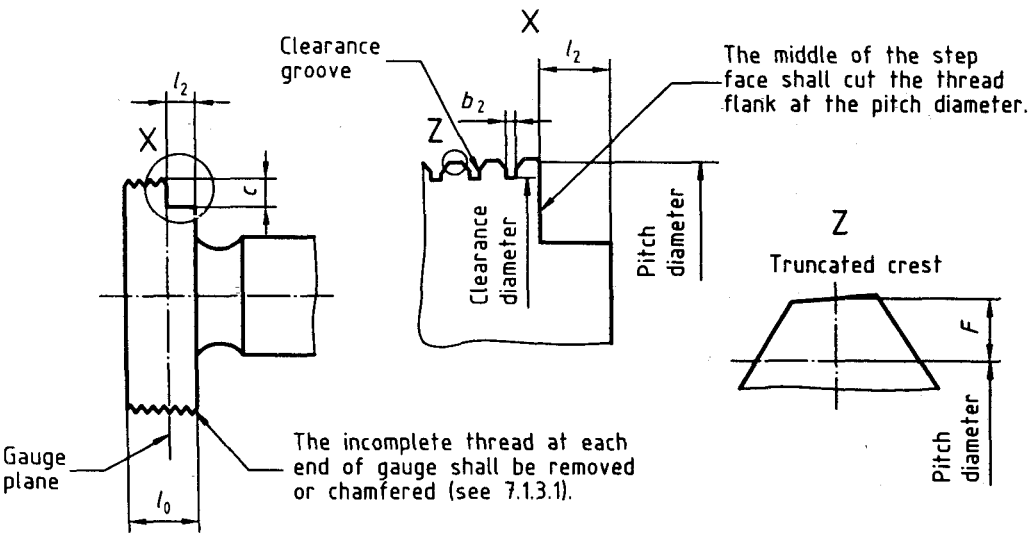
Taper modified thread form check plug gauge (gauge No. 5)
